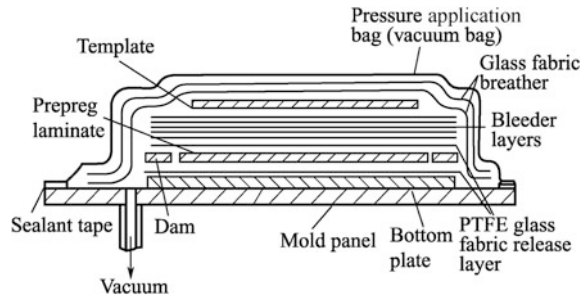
Schematic showing prepreg/autoclave part making process assembly
